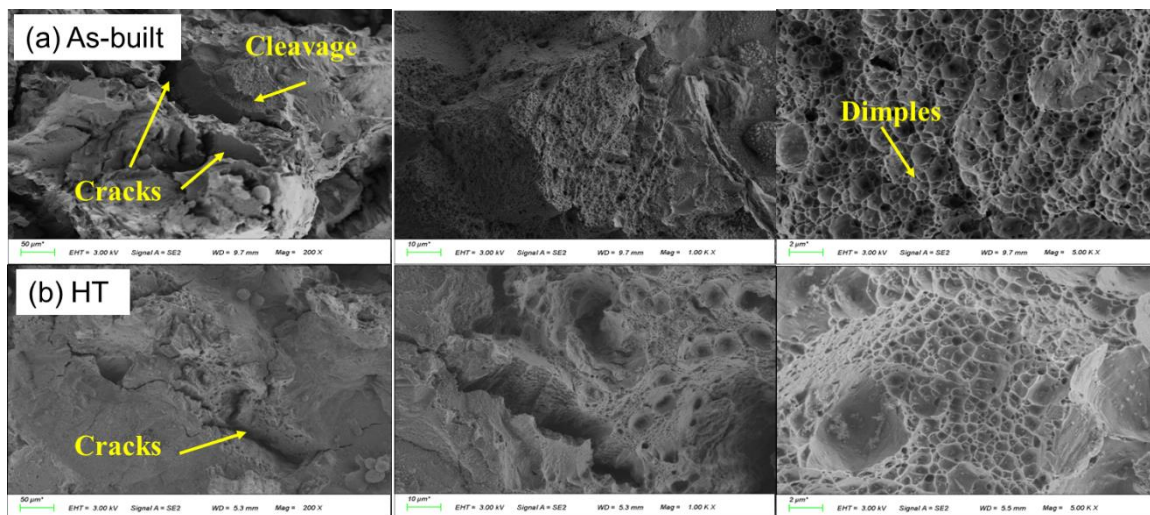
Fracture morphologies of the as-built samples after the fracture tests: (a) AA7075 and (b) HT AA7075.
